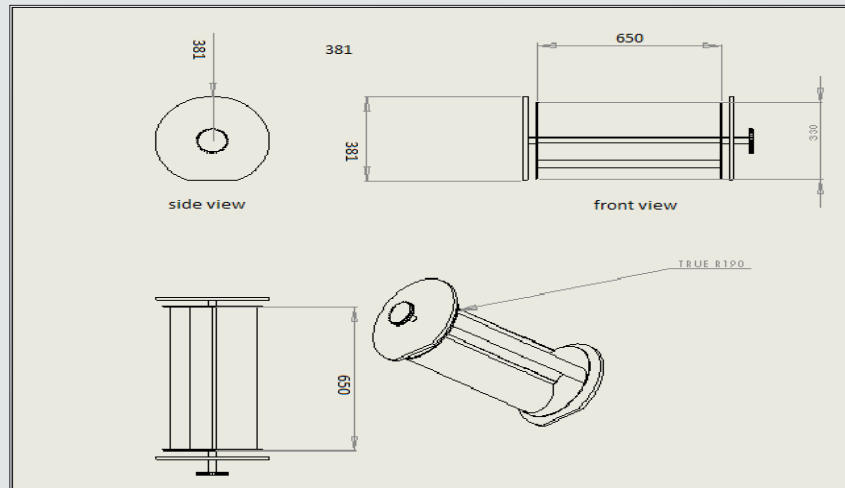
The side view, front view, top view, and isometric view of the Turbine.
